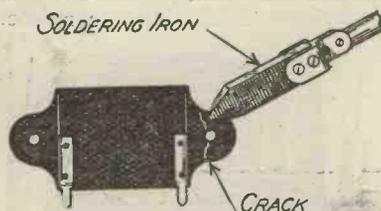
Illustrating method of repairing the broken moulding of condensers.
